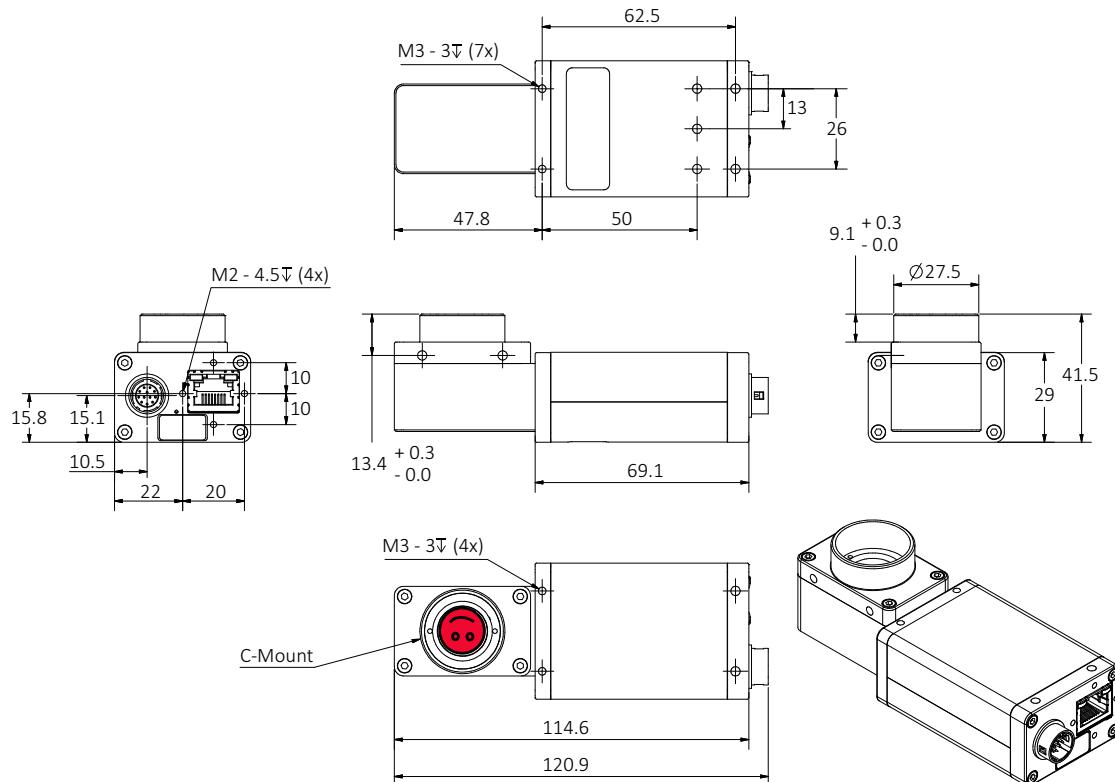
Manta type A W90 S90 housing with C-Mount dimensions
